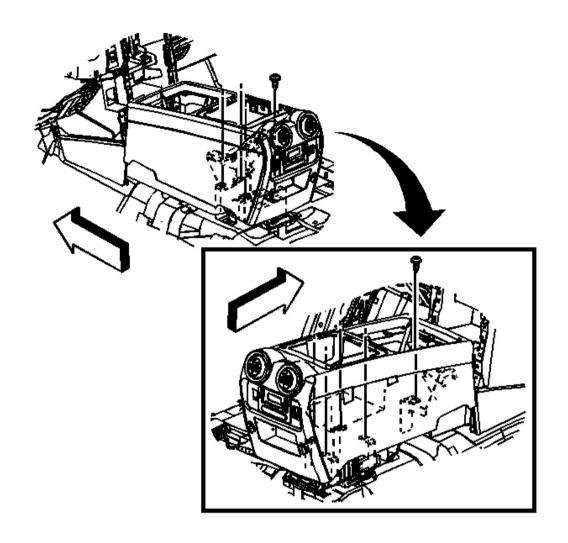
Removing & Installing Console Courtesy of GENERAL MOTORS CORP.
